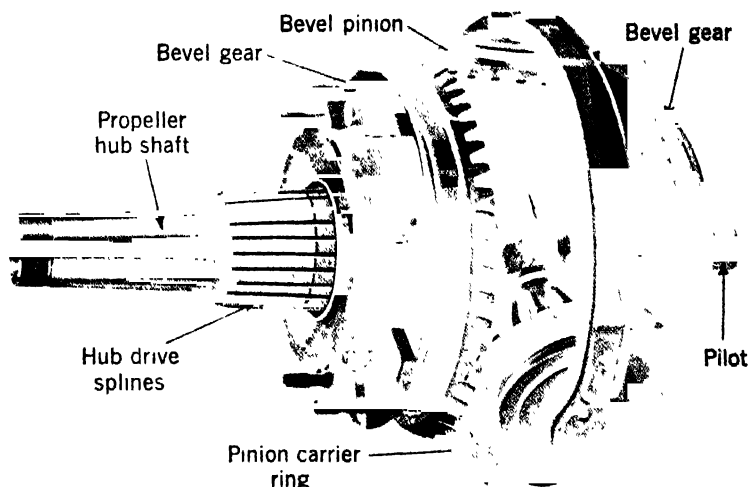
The Jupiter Reduction Gear Uses Bevel Pinions and Gears and is of the Farman Type. It is a Modification of the Differential Gearing of Automobiles.
